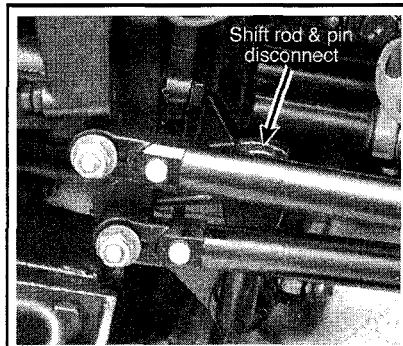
Remove the bolt, or pull the pin from the shift rod linkage, under the lower carburetor...
